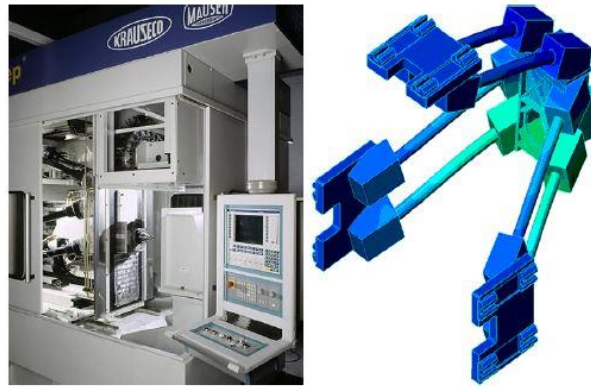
The Quickstep machining centre and the kinematic structure of the manipulator [8]
